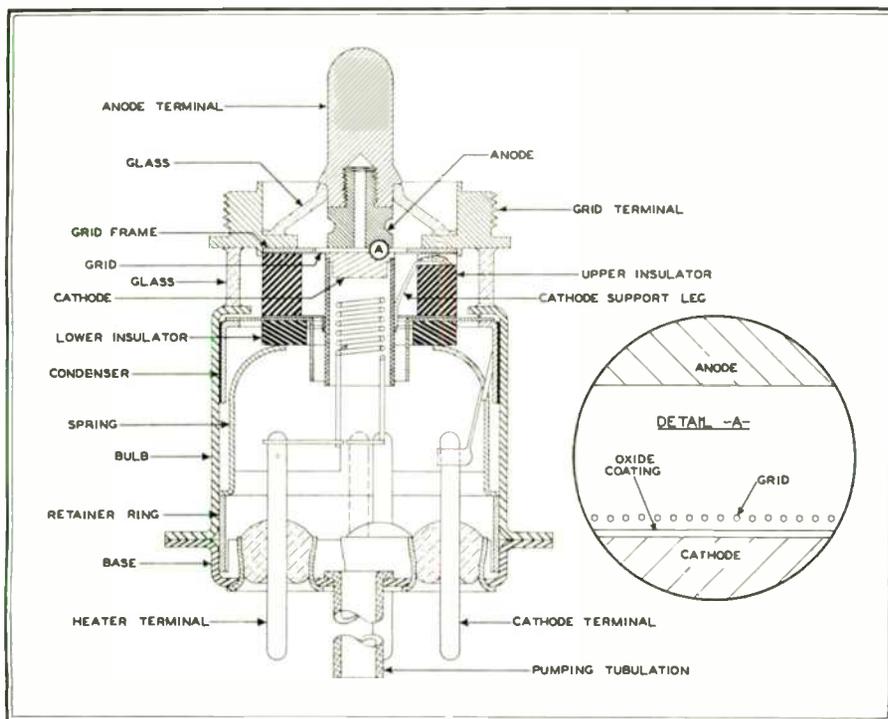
Cross-section view and detail show extremely close electrode spacings
